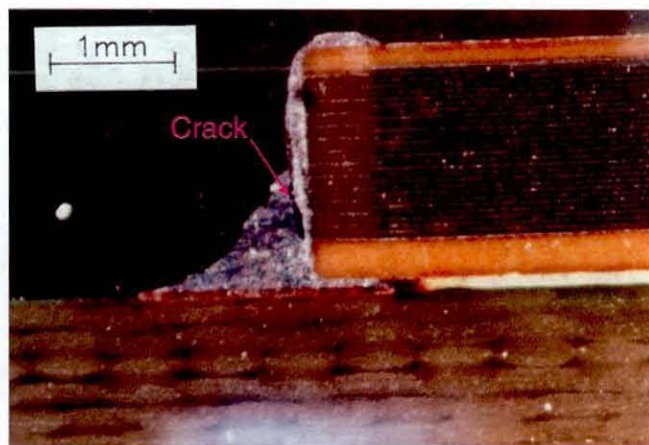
Solder fillet cracking in -55 to $+125$ °C test on 1812 size ceramic capacitors.
